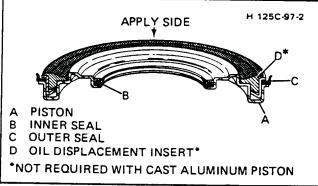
Typical Lo & Rev. Clutch Apply Piston
